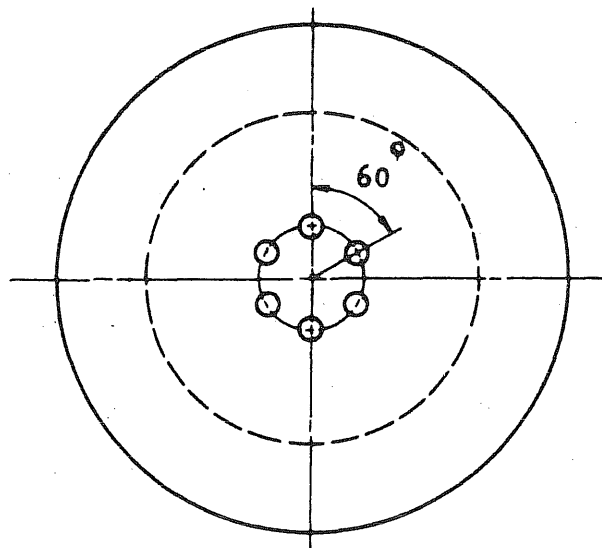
VESSEL PV19 WITH SIX 2-in. PENETRATIONS ON A 4-in. RADIUS
